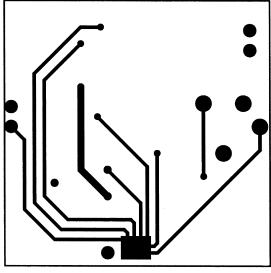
Recommended SO PC board layout: component side silkscreen
